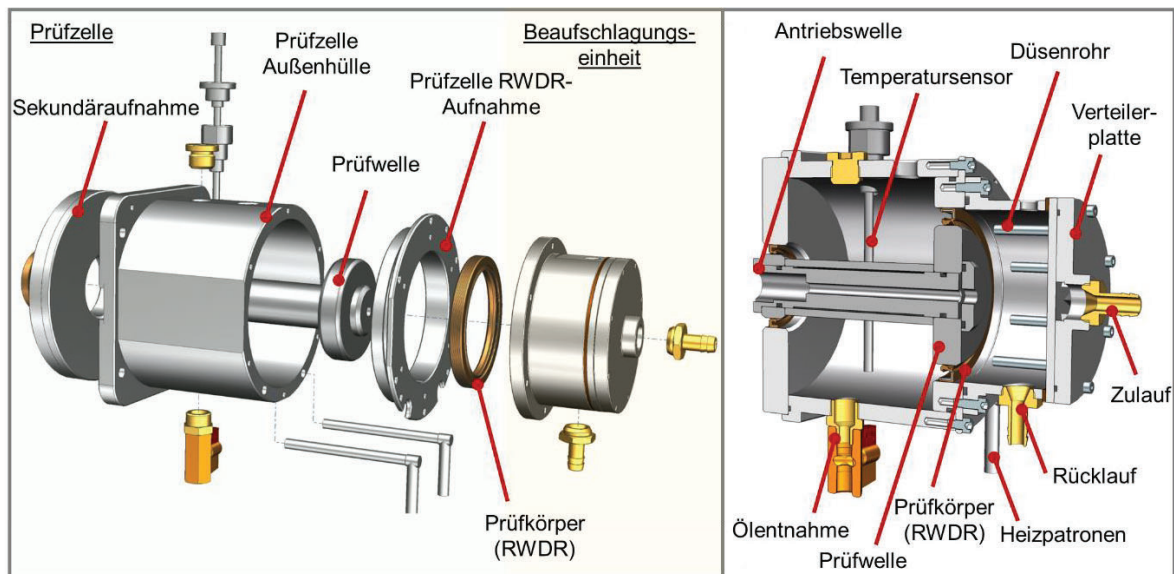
Exploded view (left) and sectional view (right) of an exemplary test cell
